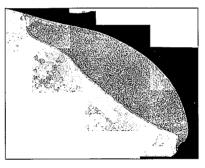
Section through hardfaced layer on circumferential face of engine valve made of titanium alloy
